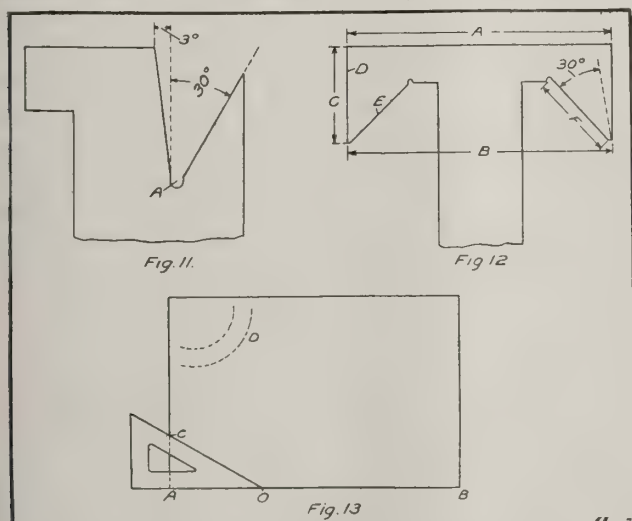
SHOWING TAPER FOR BARS. FIG. 12. TEMPLATE FOR LAYING OUT MICA COMMUTATOR RINGS. FIG. 13. SCHEME TO SECURE TAPER E OF FIG. 12.
